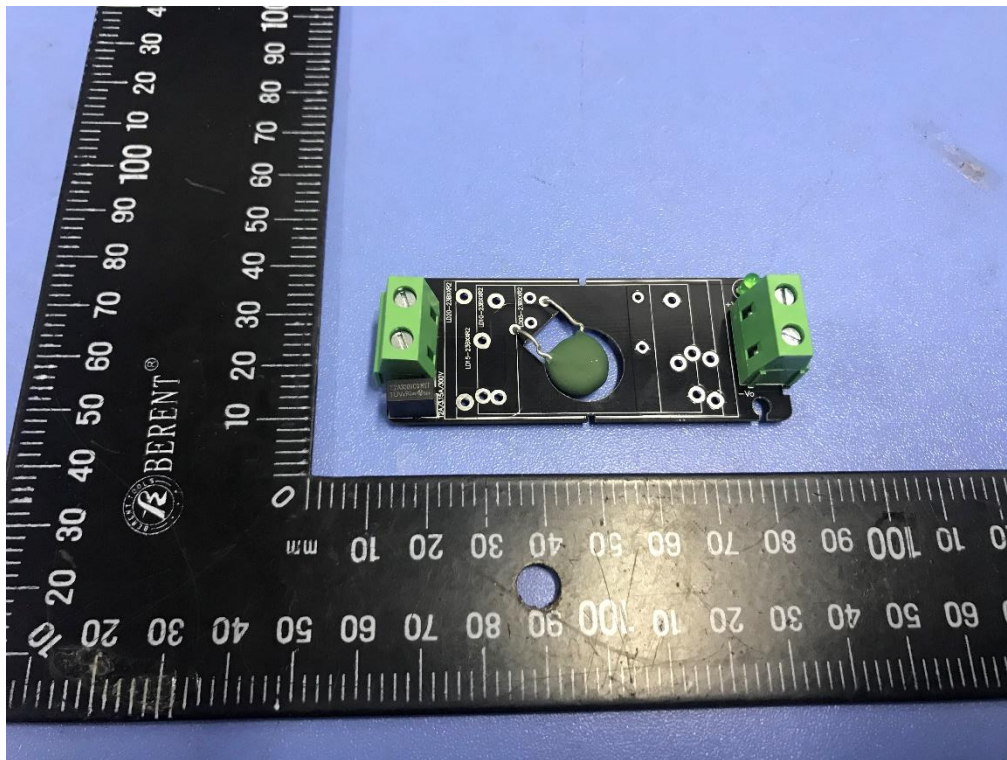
Internal view 3 (chassis and DIN-Rail mounting for the models suffix is A2S & A4S)
